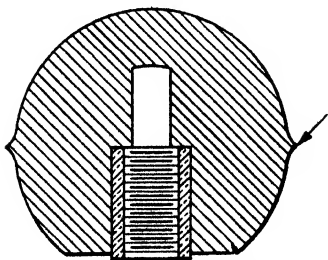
Ball knob having a bead molded at the parting. This makes flash easy to remove without leaving an unsightly mark.
